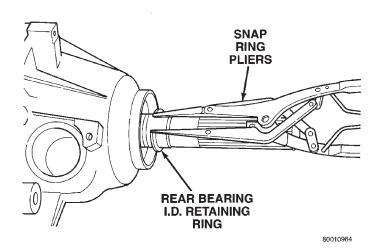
Rear Bearing I.D. Retaining Ring Removal
